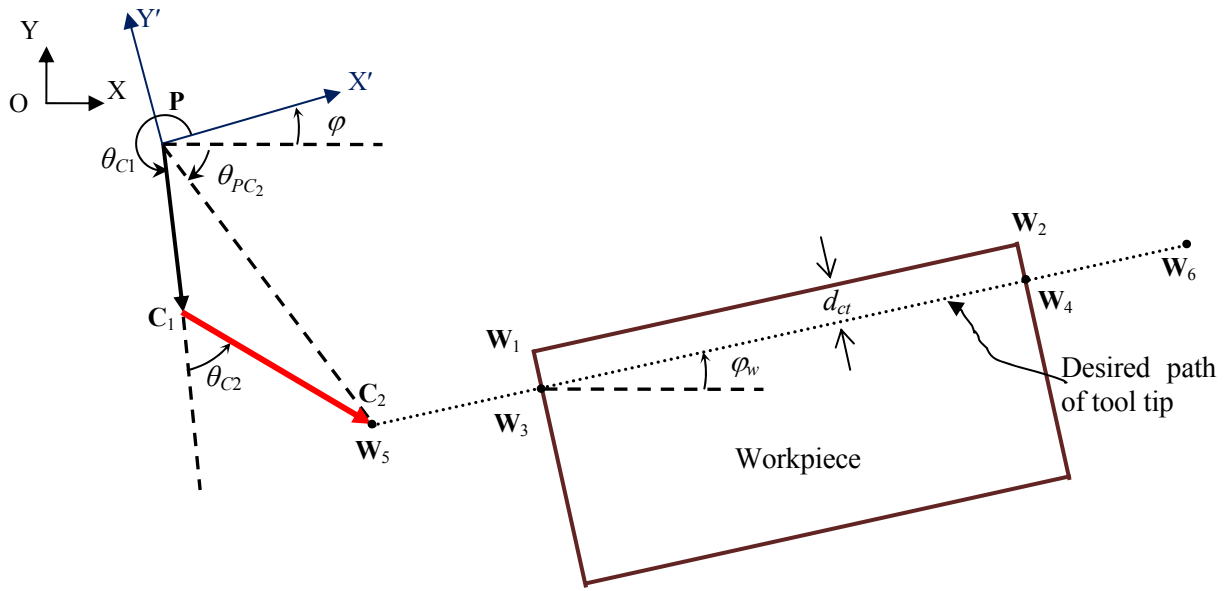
Schematic illustration of cutting tool, workpiece and desired path of tool tip.
